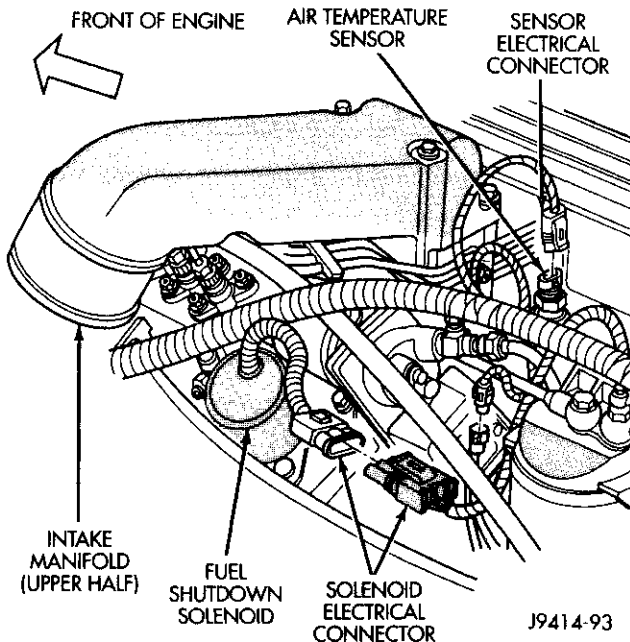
Fuel Shutdown Solenoid Connector - Diesel Engine
